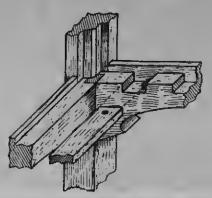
Shaped Rails fixed to Posts of Plant Stand.
